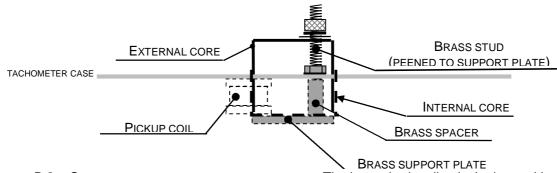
CROSS-SECTION OF IMPULSE TRANSFORMER. The heavy broken line is the internal iron core piece. (Wires and plastic former not shown,)
